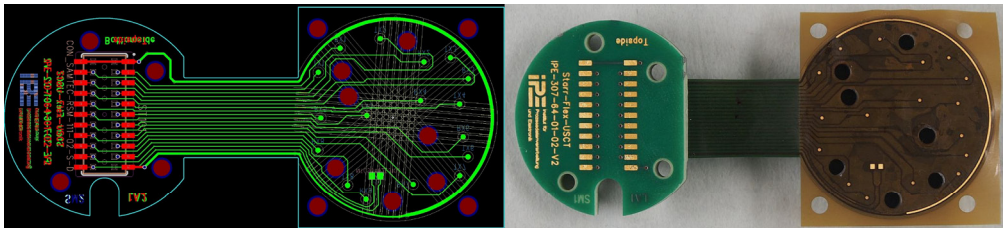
Flexprint PCB layout (left) and flex-print prototype v2 glued on a PVC substrate (right).
